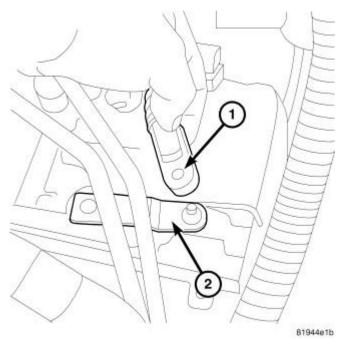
Output Shaft Speed Sensors Connectors, Bracket, Gearshift Cable & Retainers Courtesy of CHRYSLER GROUP, LLC
